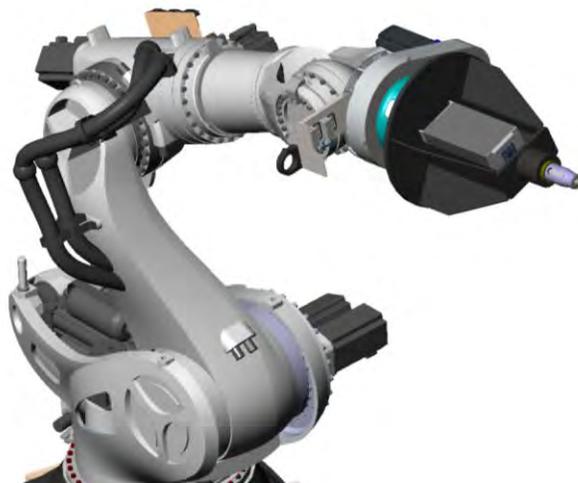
Rendering of High Clearance Ultrasonic Cutting Head on Accurate AFP Robot
